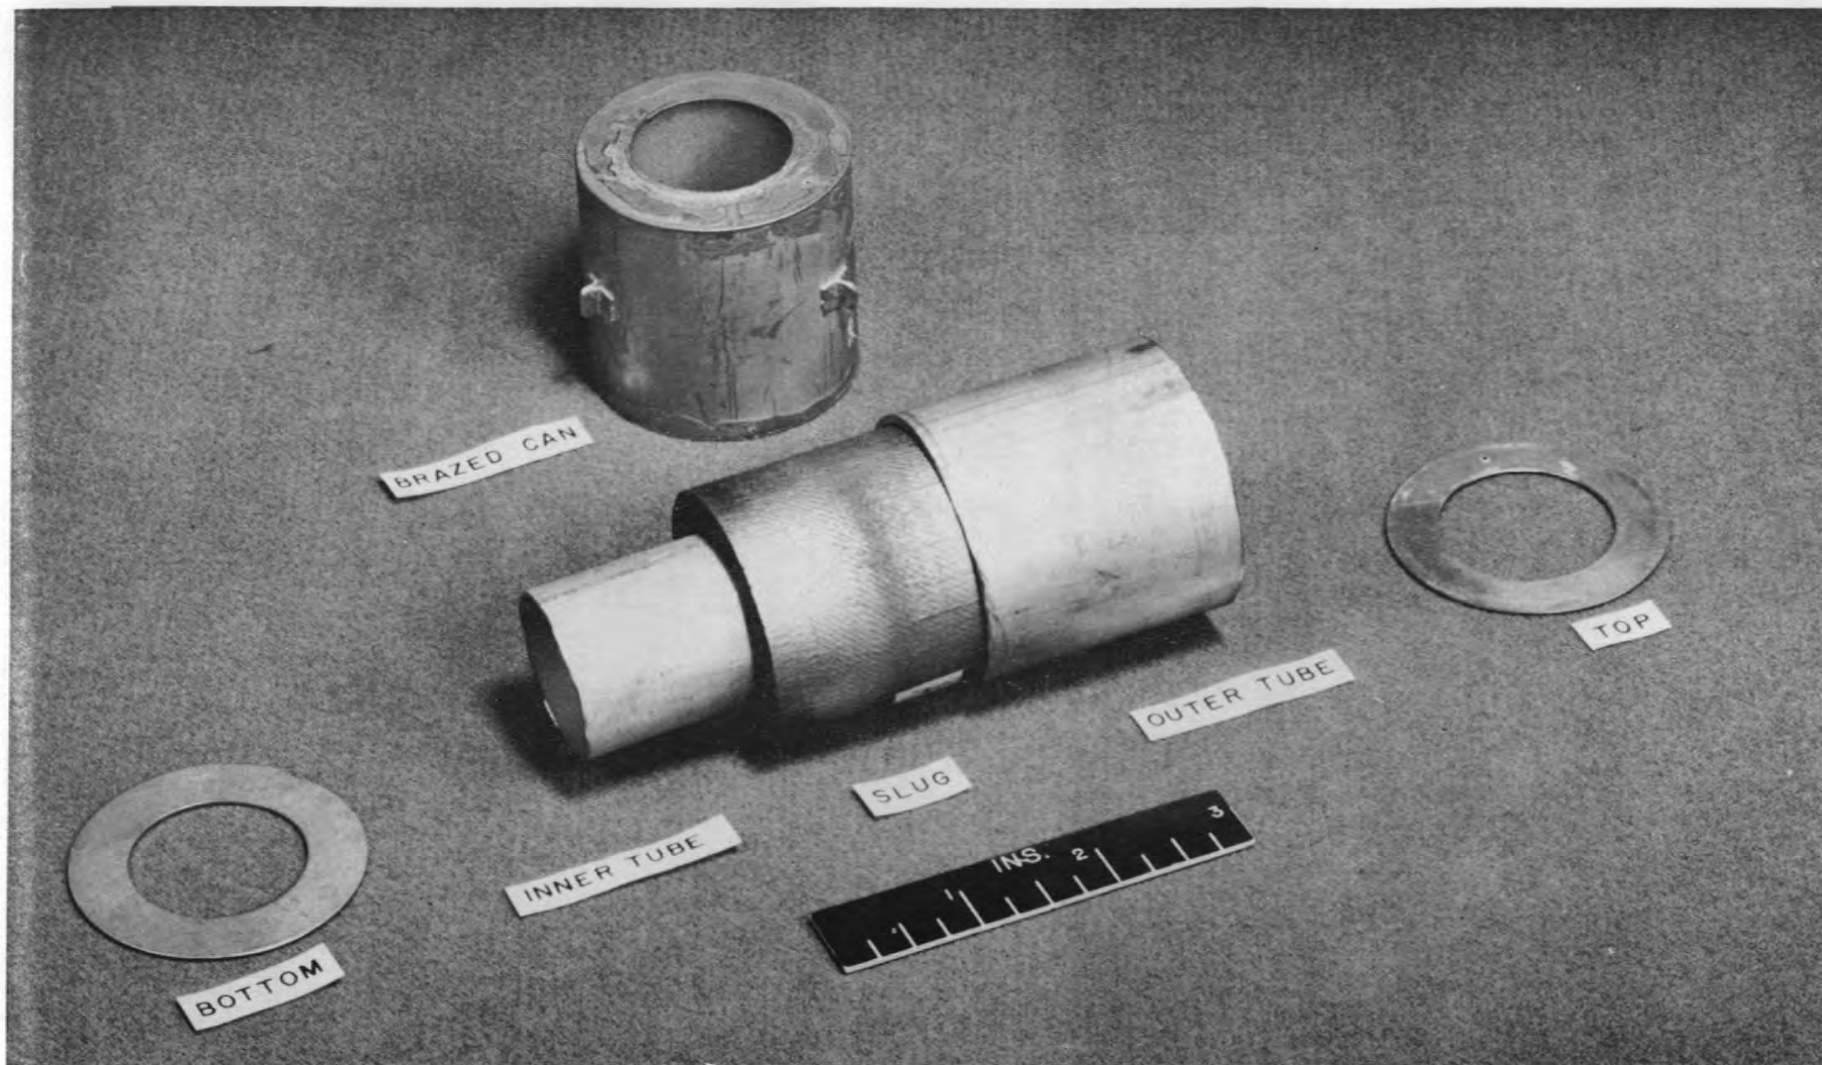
(Y-7090) Assembly for Boron Carbide-Iron Slug. Unclassified.
